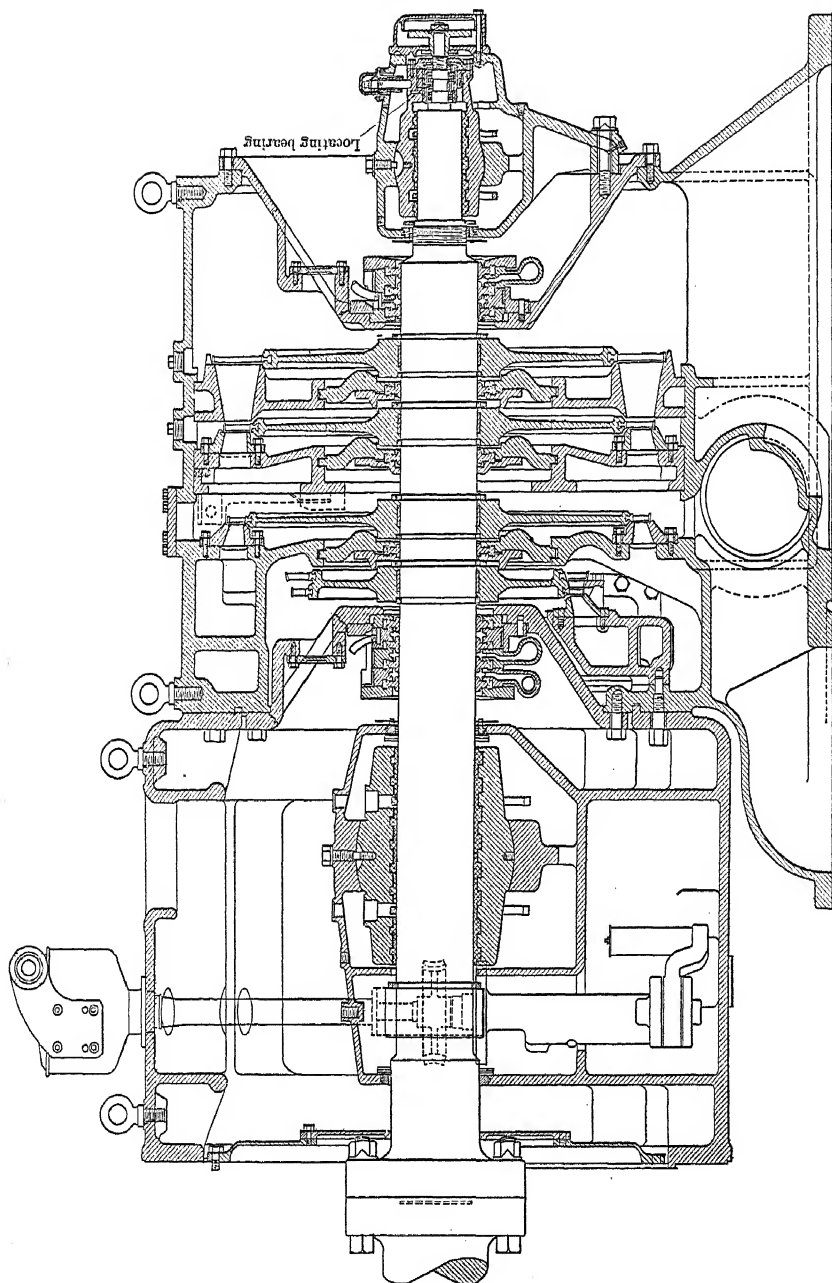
5,000-H.P. RIGID-FRAME STEAM TURBINE.
